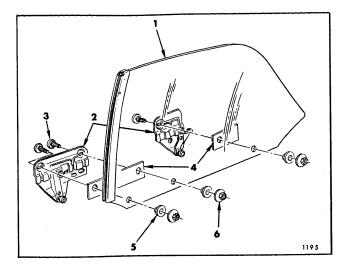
Rear Door Window Assembly - "Z-39" Style
